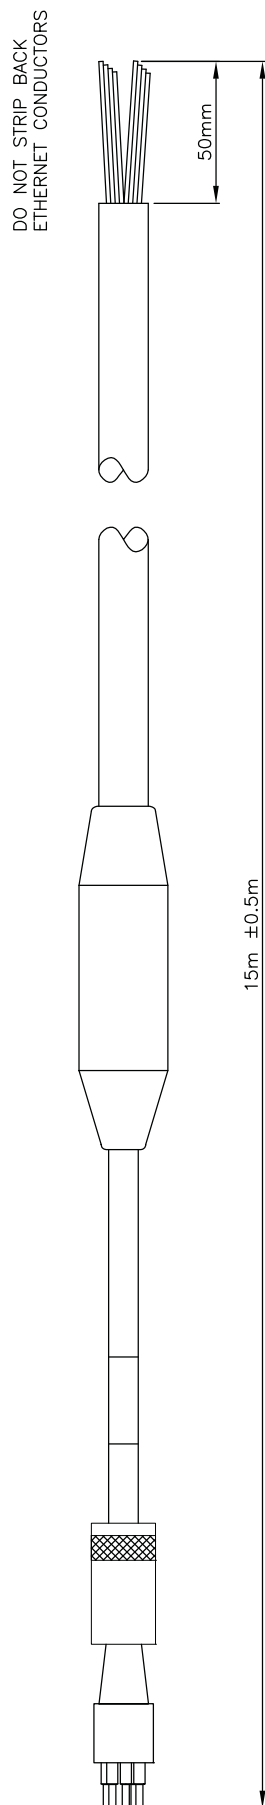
Subsea Lodestar Comms Ethernet tail cable assembly – 8084-138-01
